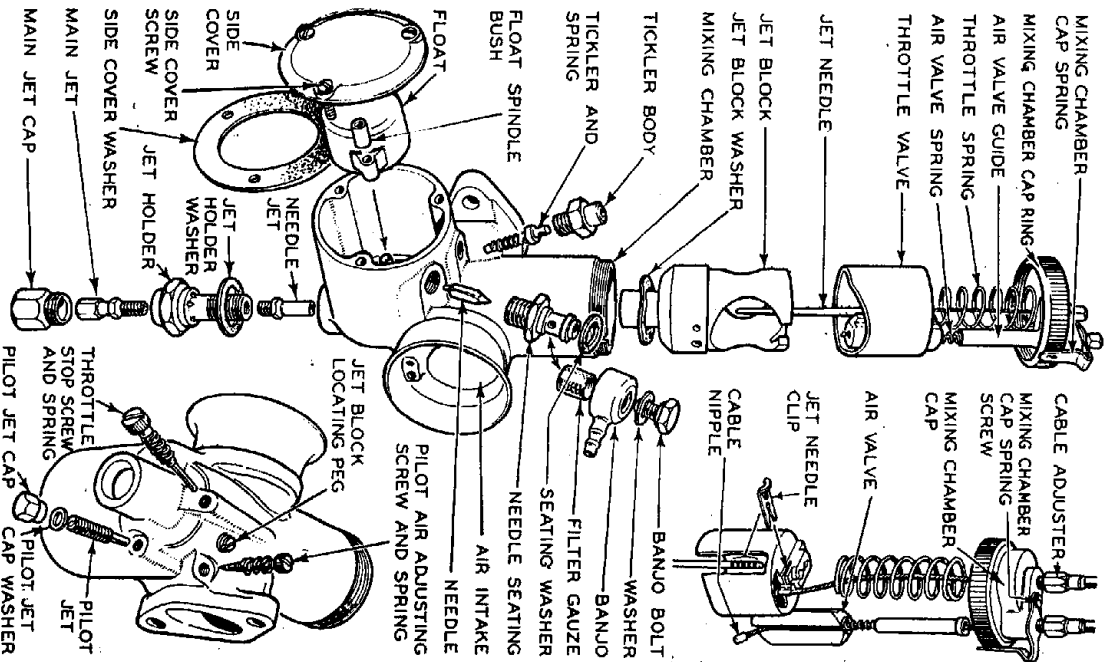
EXPLODED VIEW OF AMAL MONOBLOC TYPE 376/6 CARBURETTOR.
